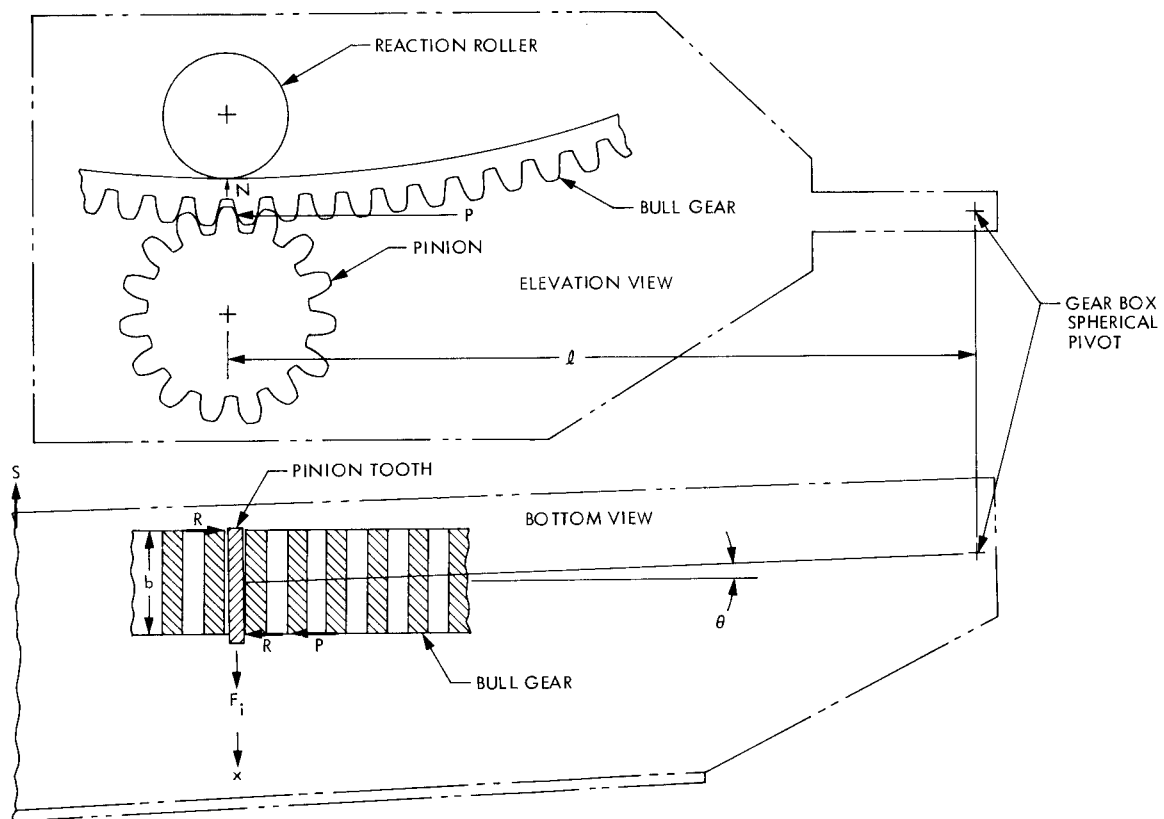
Schematic of the elevation drive gears, showing forces considered
